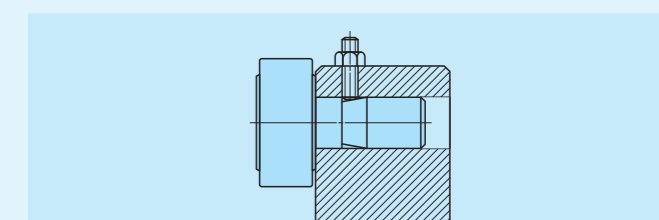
Mounting examples of Easy Mounting Type Cam Followers
